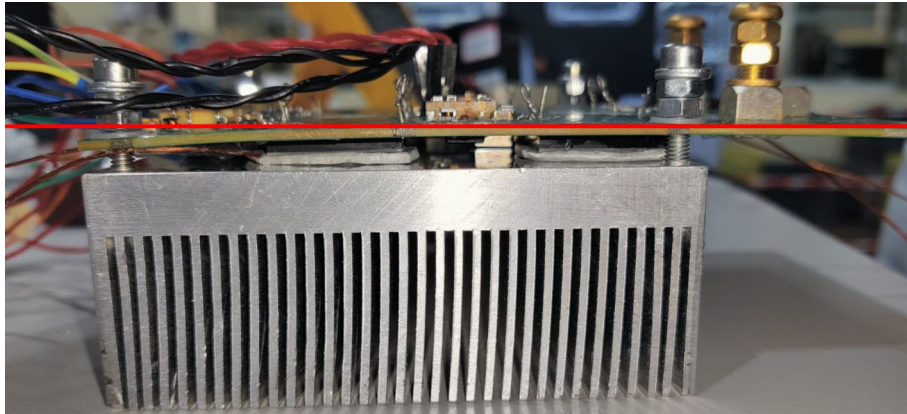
Single-phase 3LFC prototype PCB deformation once mounted on the heatsink.
